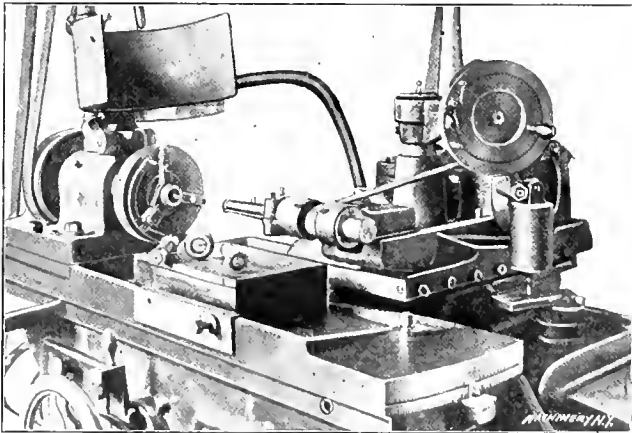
Grinding the Bore of the Cams Concentric with the Cylindrical Surface
